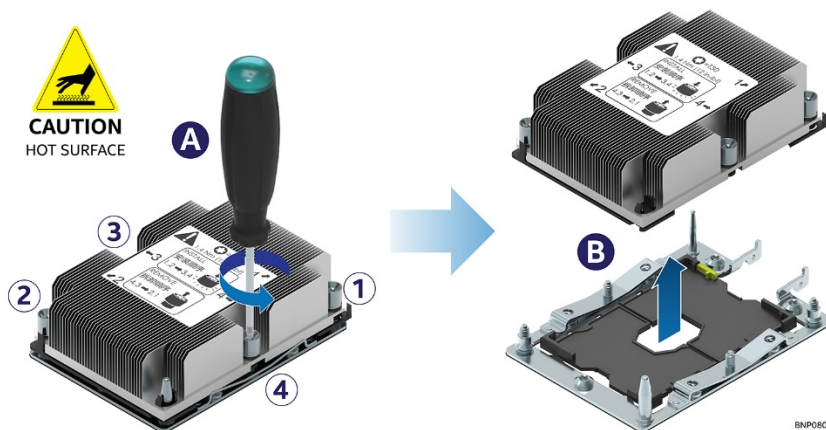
Uninstalling the Processor Heat Sink Module (PHM)
